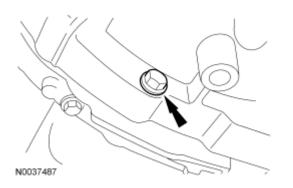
Locating Oil Pan-To-Bellhousing Bolts Courtesy of FORD MOTOR CO.
